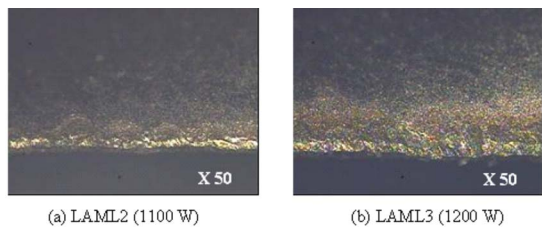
Flank wear of the TiAlN coated carbide tools after 60 mm cutting of LAML
